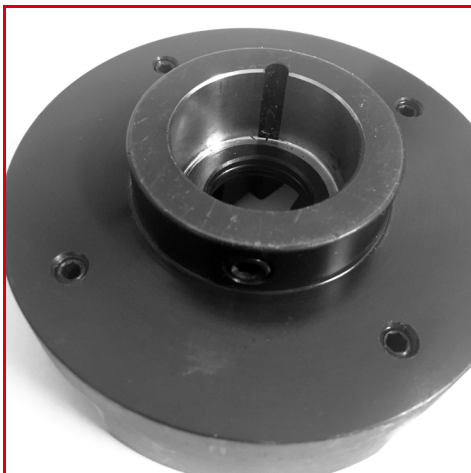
TOOL HOLDER SET SCREW AND KEY SLOT
